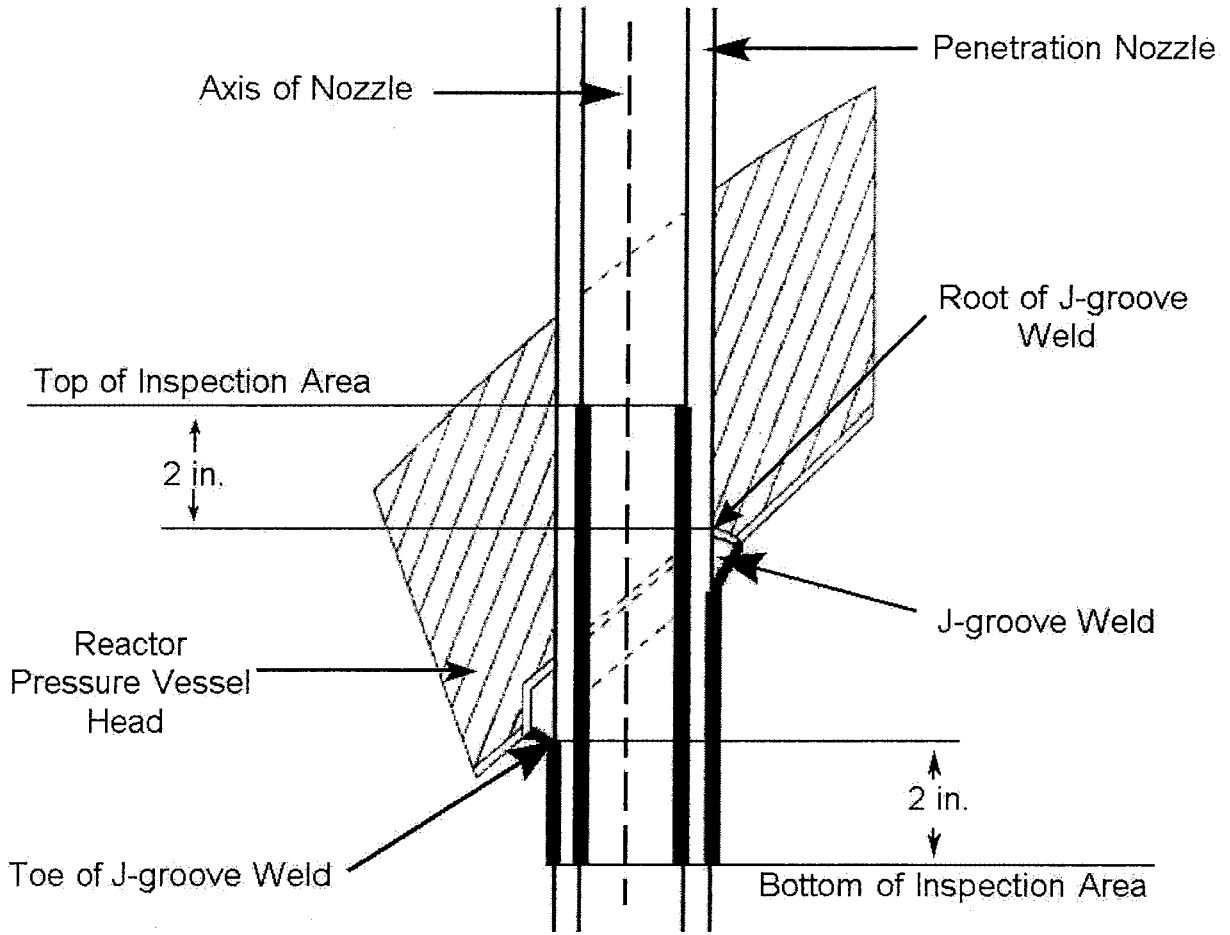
Required Wetted Surface Inspection Area Without Stress Analysis (The penetration nozzle and J-groove weld surface areas in black require surface inspection.)
